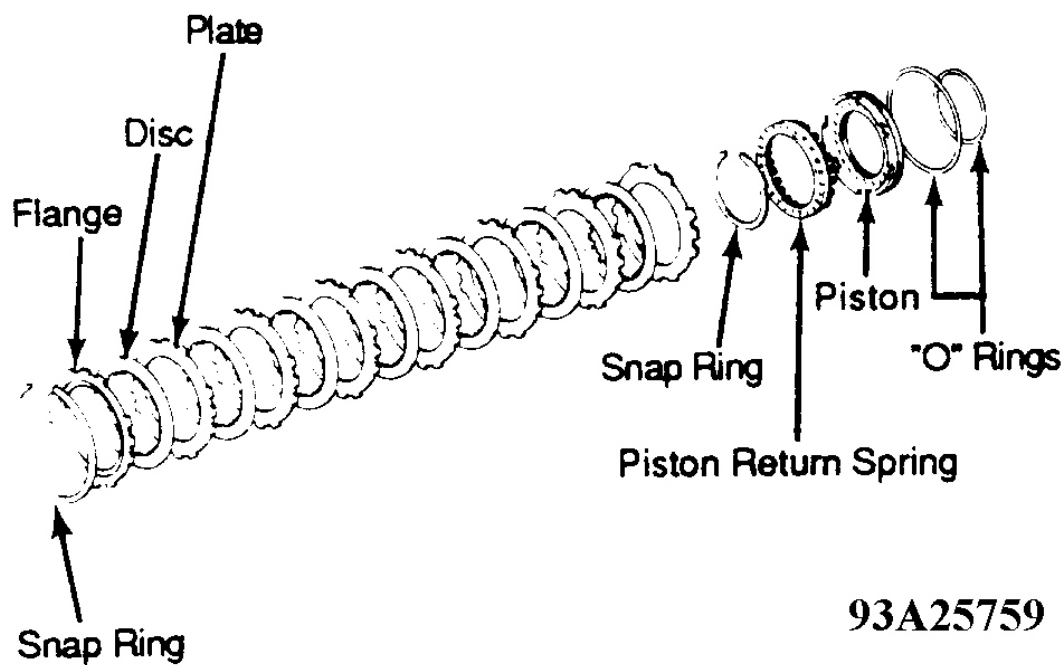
Exploded View Of 1st & Reverse Brake Piston (A-540E Shown; A-540H is Similar)
